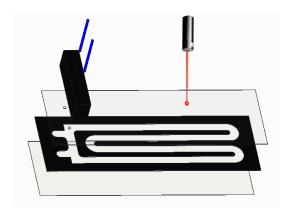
Schematic of the PHS assembly and laser welding process.
